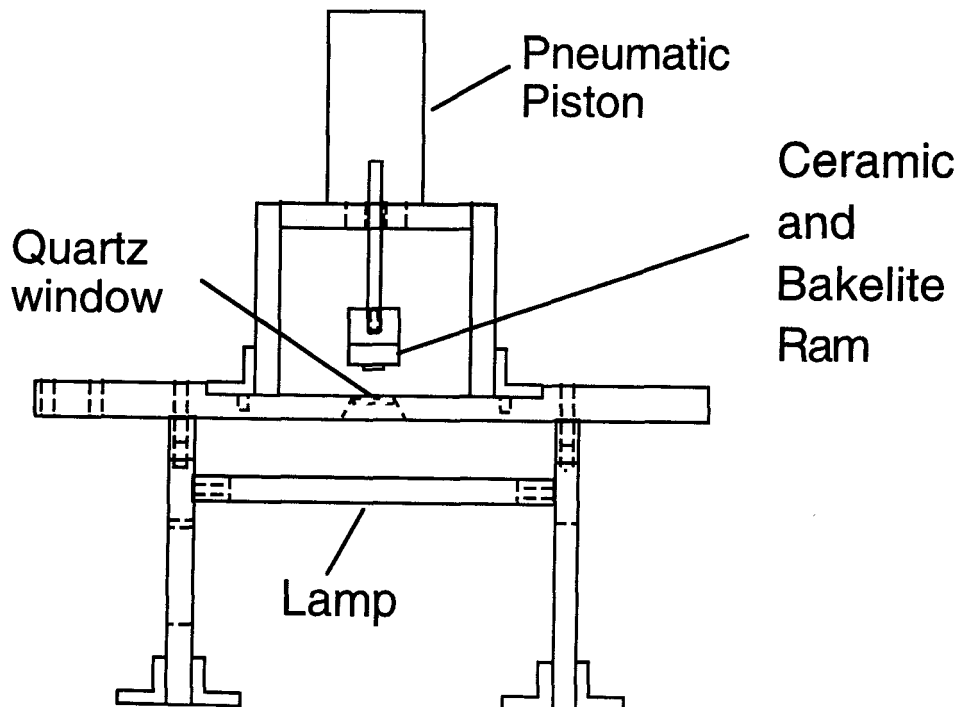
Schematic of welding apparatus. Overall height: 47 cm.
